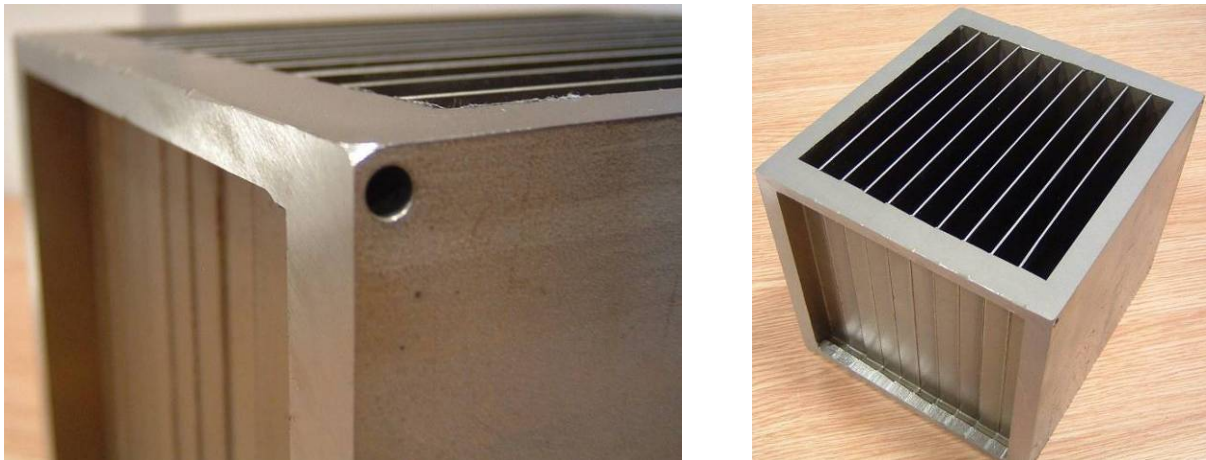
One of the Generators Machined to Receive Manifolds with O-ring Seals
